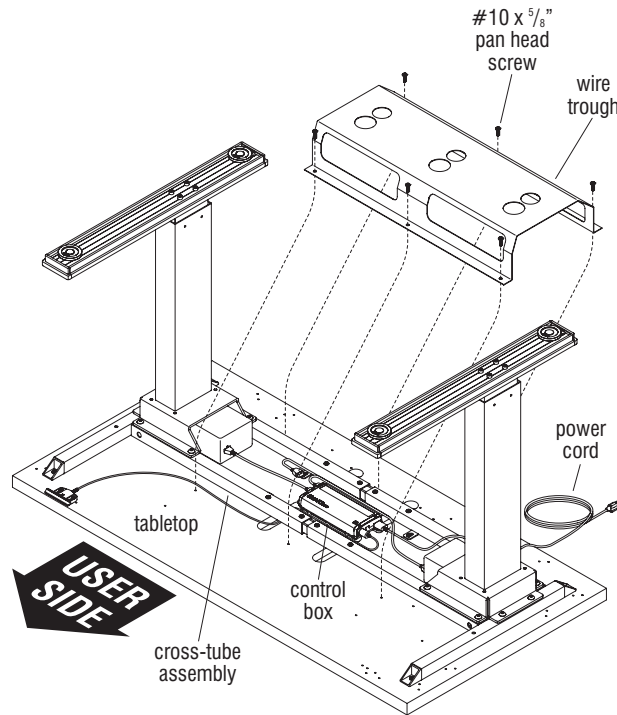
Centered Wire Trough with Control Box Between Cross-Tube Assembly
